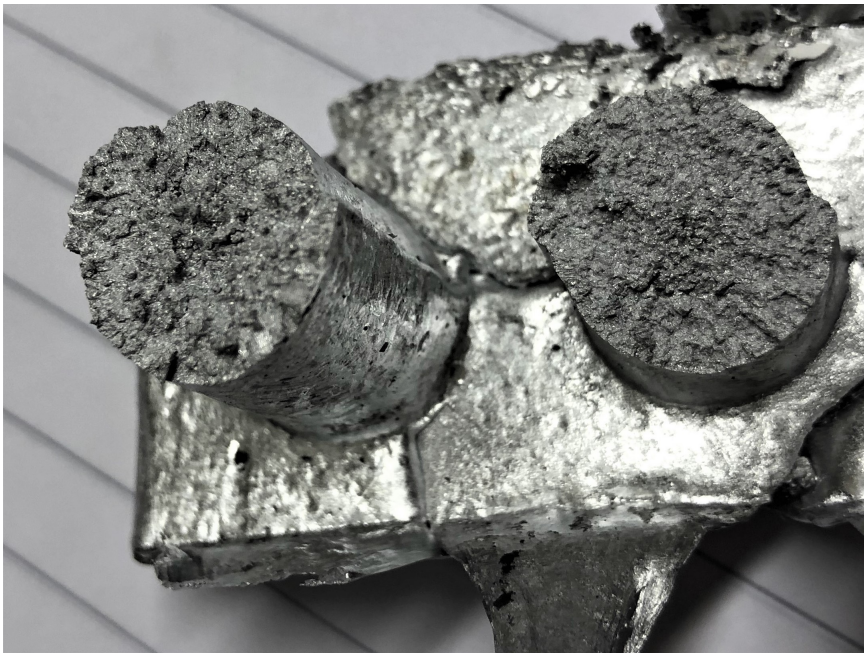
When casting samples for tensile testing, some of the 6082 casts were brittle and could almost be broken by hand.
